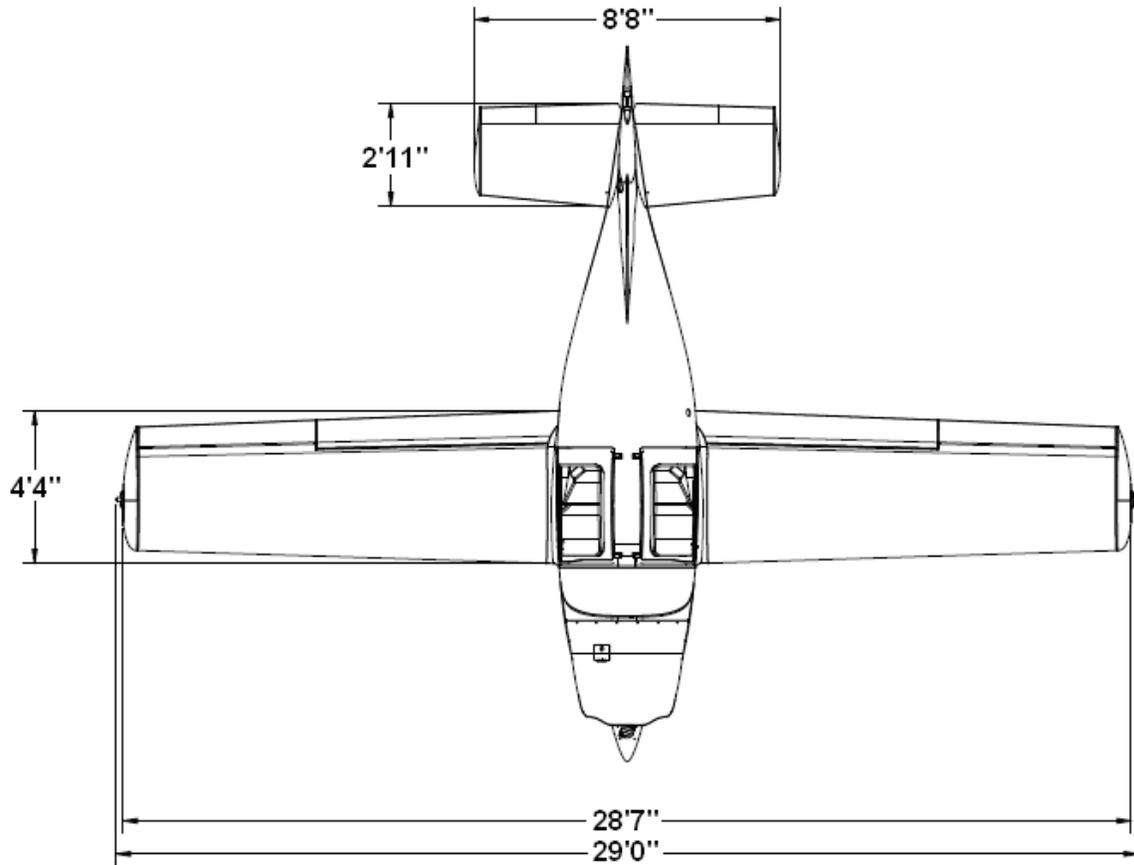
(Reference Only) Top View of Airplane Dimensions
